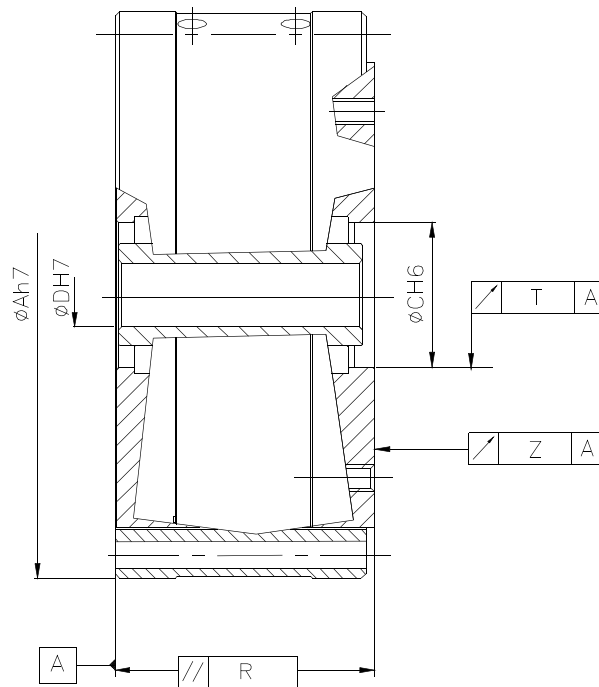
Circumferential and front run-out values of TwinSpin bearing reducers / Rund- und Stirnlaufabweichungen der TwinSpin Präzisionsgetriebe
